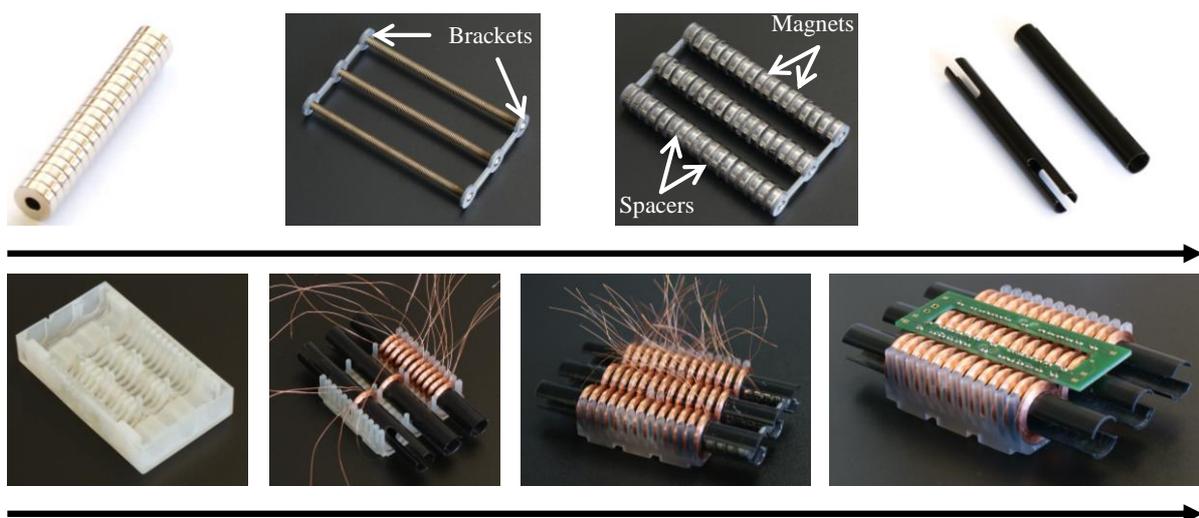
Depiction of the fabrication process from top left to bottom right. Placement of magnets, steel spacers, supporting steel brackets and coils in a 3D-printed housing is shown.
